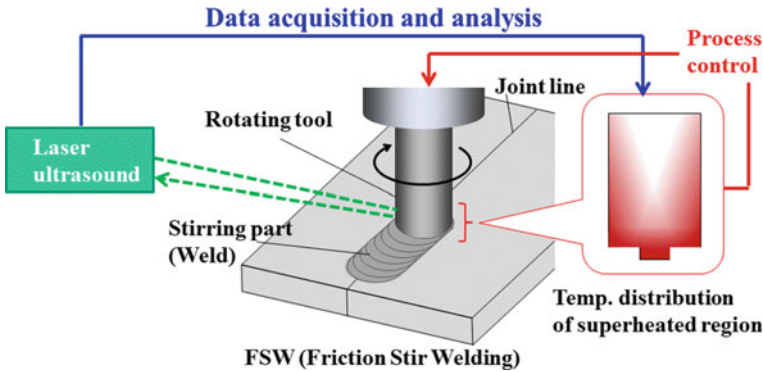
A schematic showing an advanced process control using a laser-ultrasonic technique for a friction stir welding (FSW) process based on online non-contact temperature measurements inside the rotating tool
